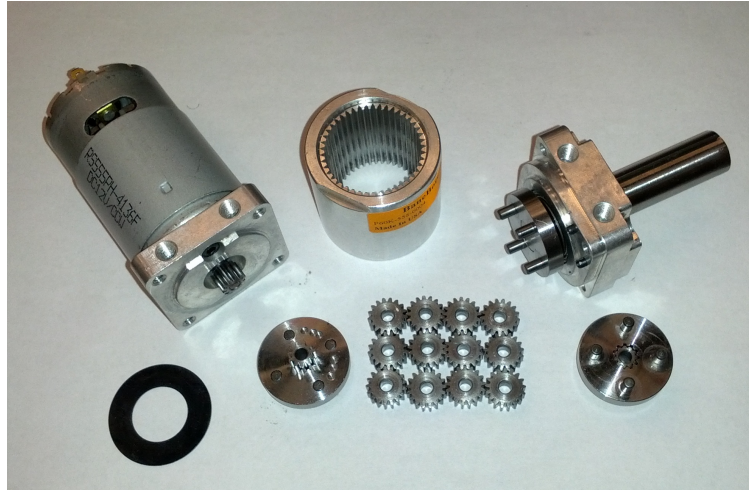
Planetary gearmotor assembly for the arm mechanism.
